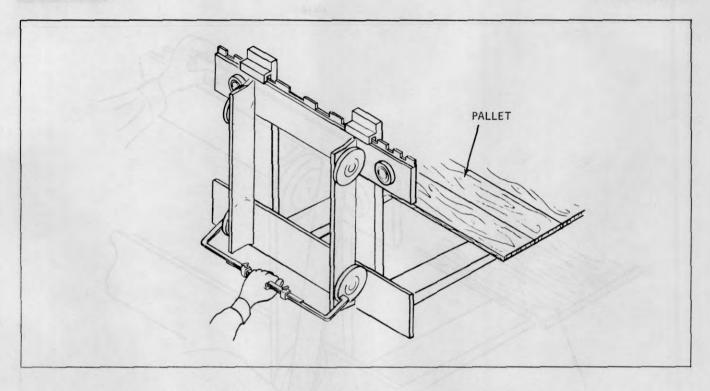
Spanning Lower Rollers (Four Roller Carriage)
